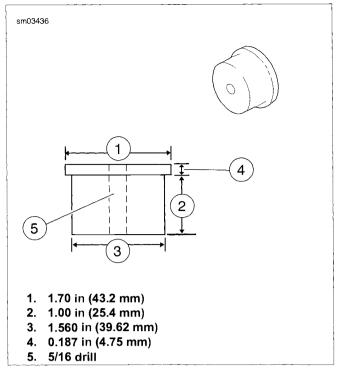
Pinion Shaft Outer Race Removal Tool
